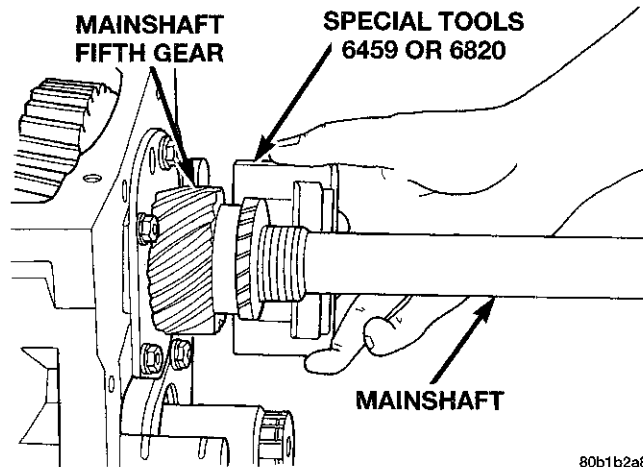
Installing First Puller Jaw On Mainshaft Fifth (Overdrive) Gear
